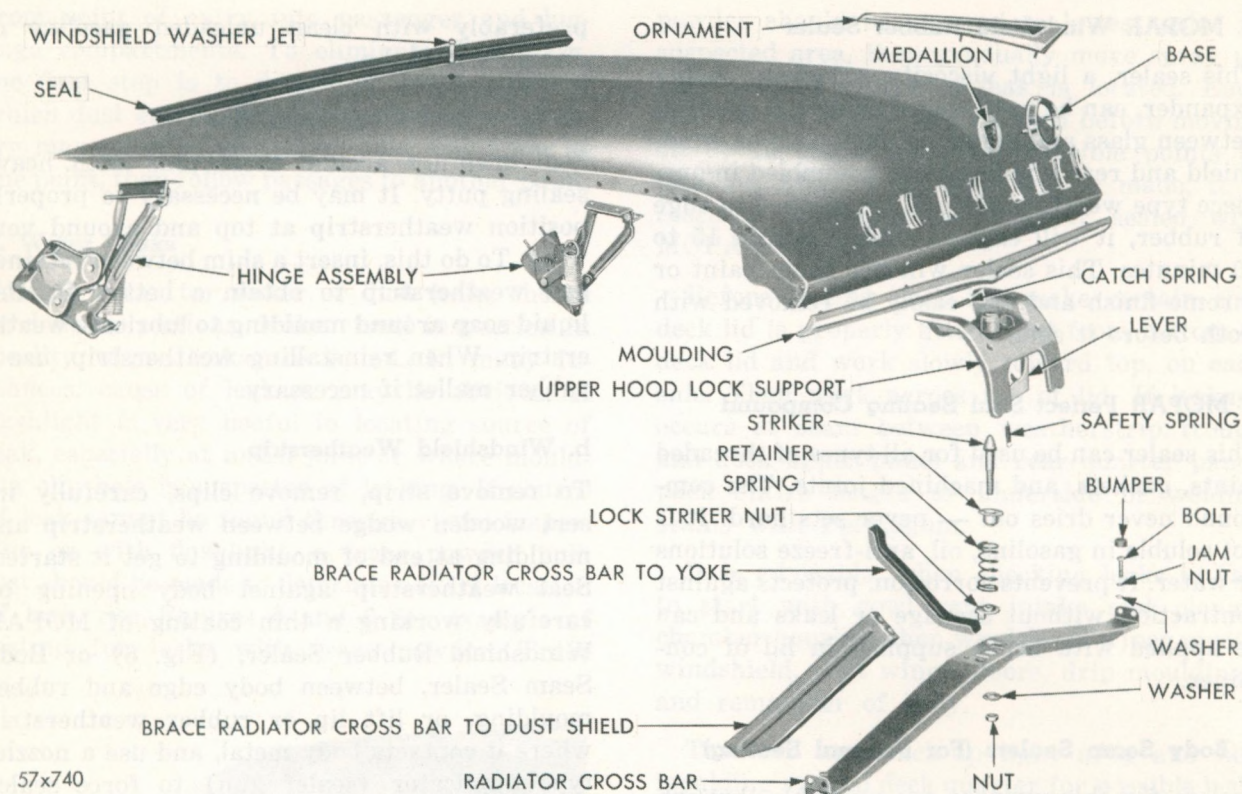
Hood (Disassembled View) (C-75, C-76)
